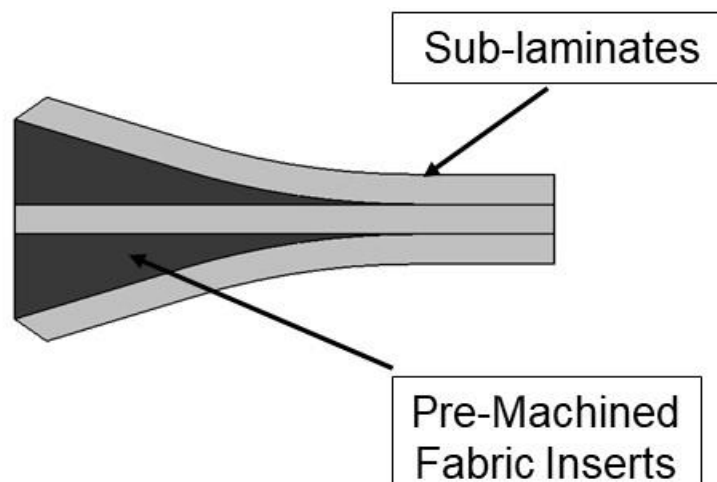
Schematic Showing How Dovetail of Subelement Test Specimen Was Constructed And Machined
